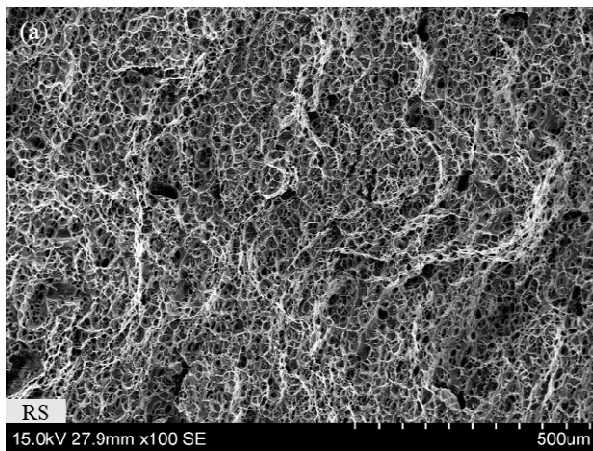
Fracture surfaces of FSW-10A sample showing failure in the HAZ of RS.
